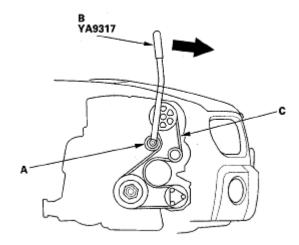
Moving Auto-Tensioner Using Belt Tension Release Tool
